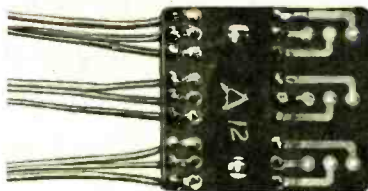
Resistor card, with printed circuit wiring to provide all connections between switch blocks and wiring.
